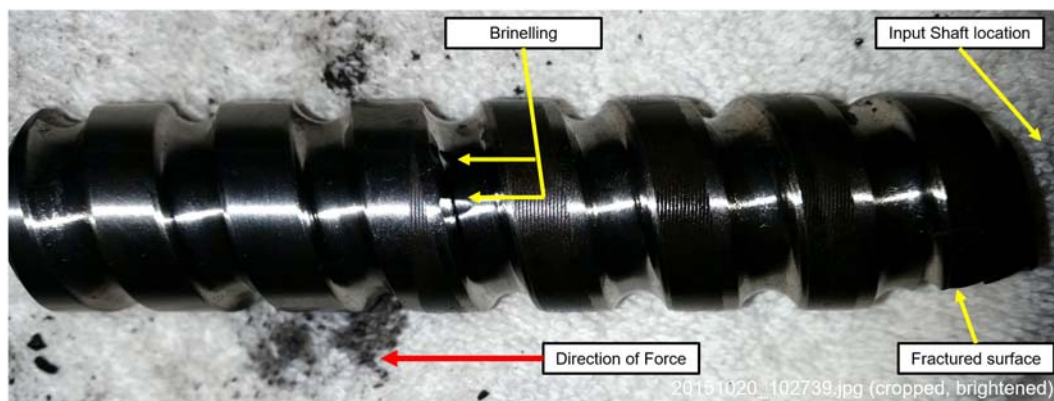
Worm screw with brinelling prior to being cut into multiple pieces.
